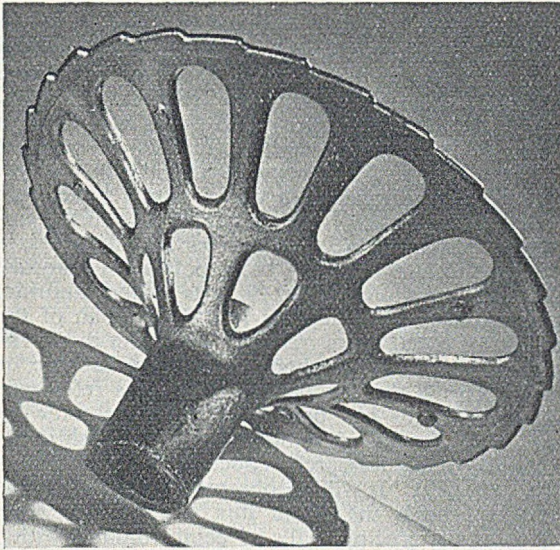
Thread Guide for the British Northrop Loom Company, Limited. Gravity Die Casting in Aluminium R.R.51 Alloy containing 0.8 to 1.75 per cent. Nickel. Base, 13 in. diam.; shank, 2½ in. diam.; centre hole, 1½ in. Notches around Edge for Guiding Thread.
